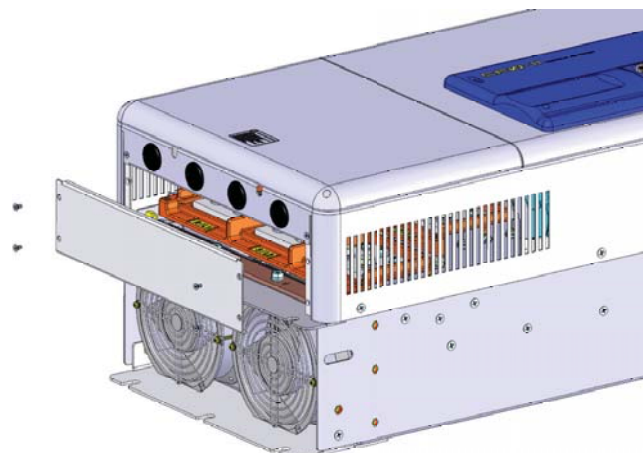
Removal of the bottom plate, to access the power terminals
